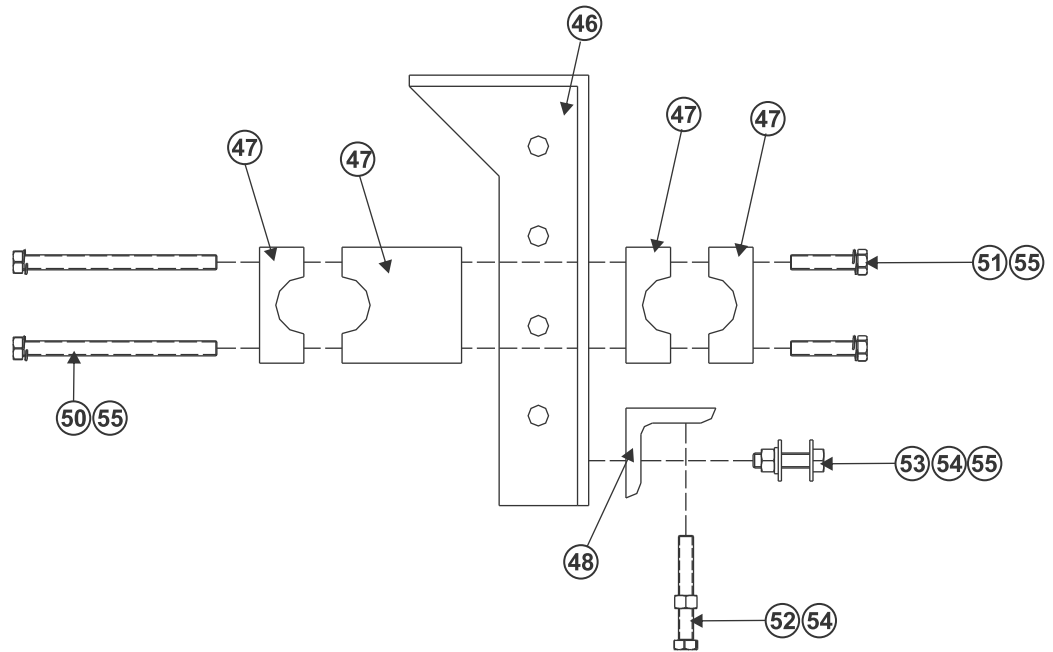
Bolt-Up Tensioner with Spray Bar Kit – Exploded View
